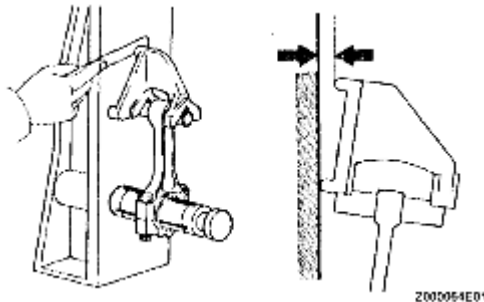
Checking Connecting Rod Alignment For Misalignment
